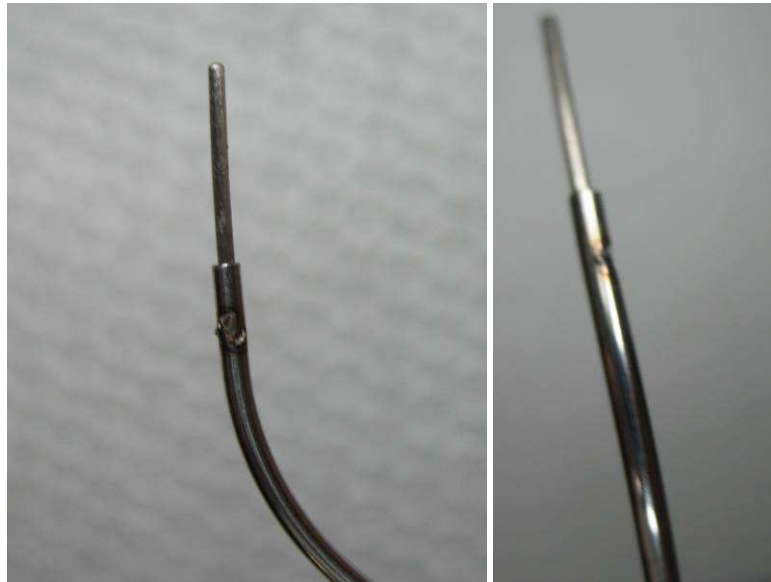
Thermocouples spot-welded to stainless steel pipe.
